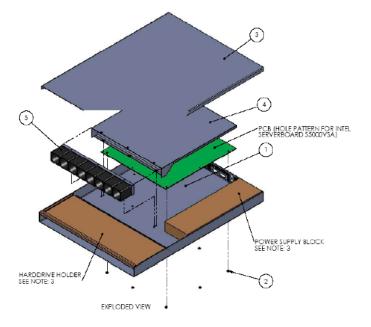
Exploded View of the Ujet-1000<sup>™</sup> and the Therm-Jet Cooling Duct.
